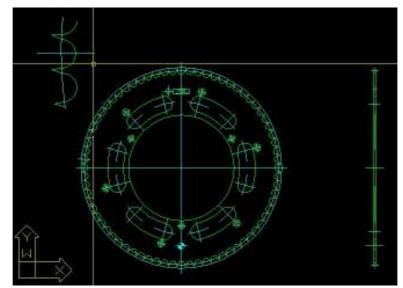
Example drawing for ONE VIEW projection with Polyline
